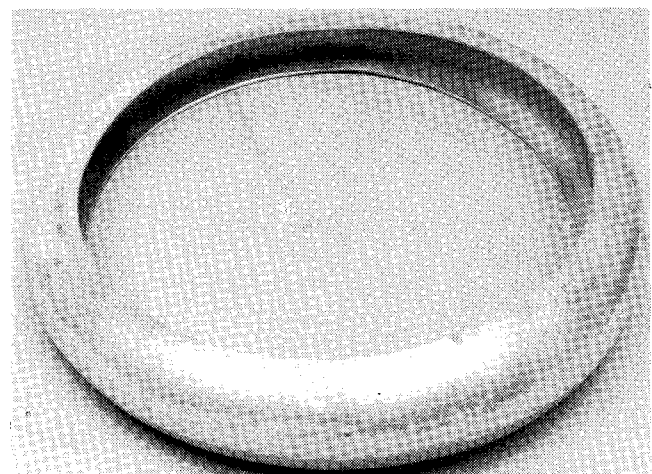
Electron beam welded superplastically formed Inconel 718 manifold half-sections.
